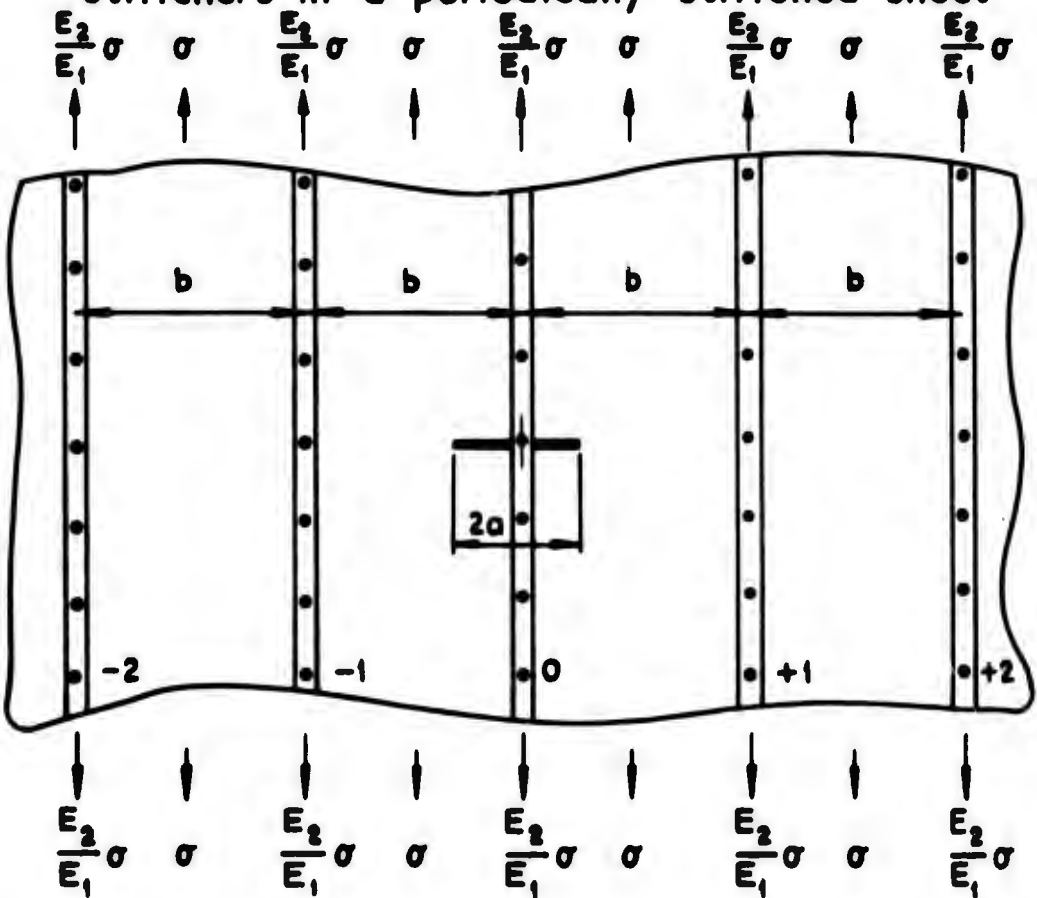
Crack located symmetrically about one of the riveted stiffeners in a periodically stiffened sheet
